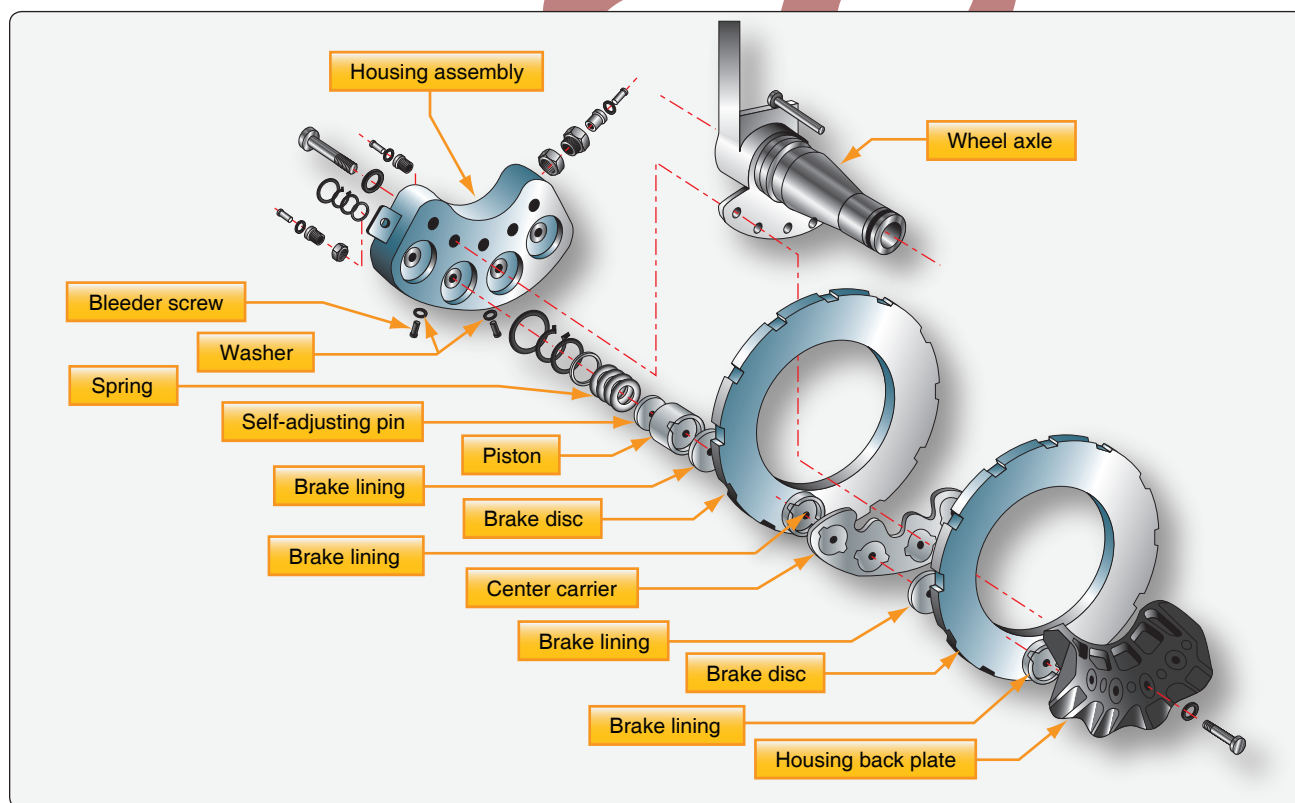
A dual-disc brake is similar to a single-disc brake. It uses a center carrier to hold brake linings against each of the discs.
